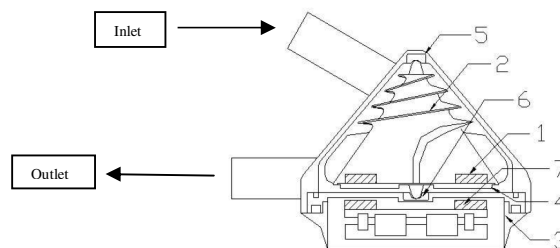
Implantable Centrifugal Blood Pump and actuator. 1) magnet coupling in pump rotor; 2) pump rotor; 3) actuator (BLDC motor); 4) scraper to move the blood; 5) bearing top; 6) bearing bottom; and 7) magnet coupling in BLDC motor (Bock *et al*, 2010).
